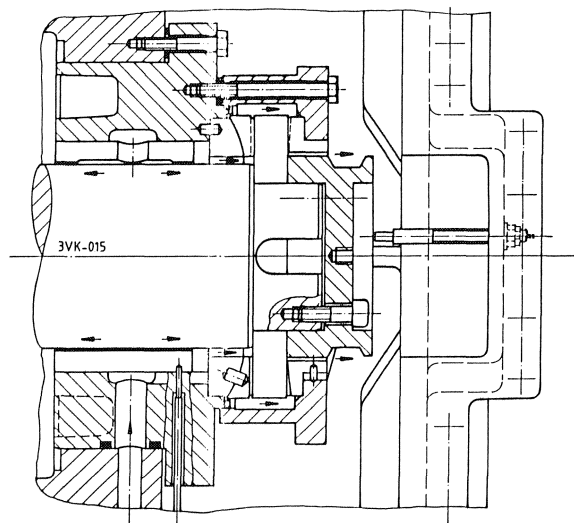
Self-Adjusting Multisegment Thrust Bearing.
